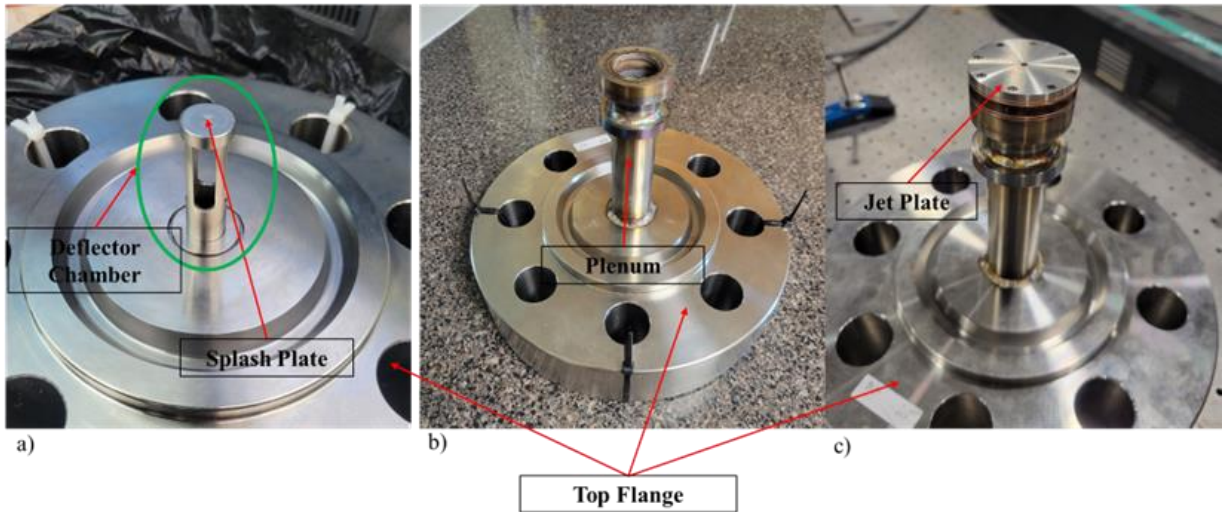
Top flange assembly a) Deflector chamber b) Plenum c) Jet plate
